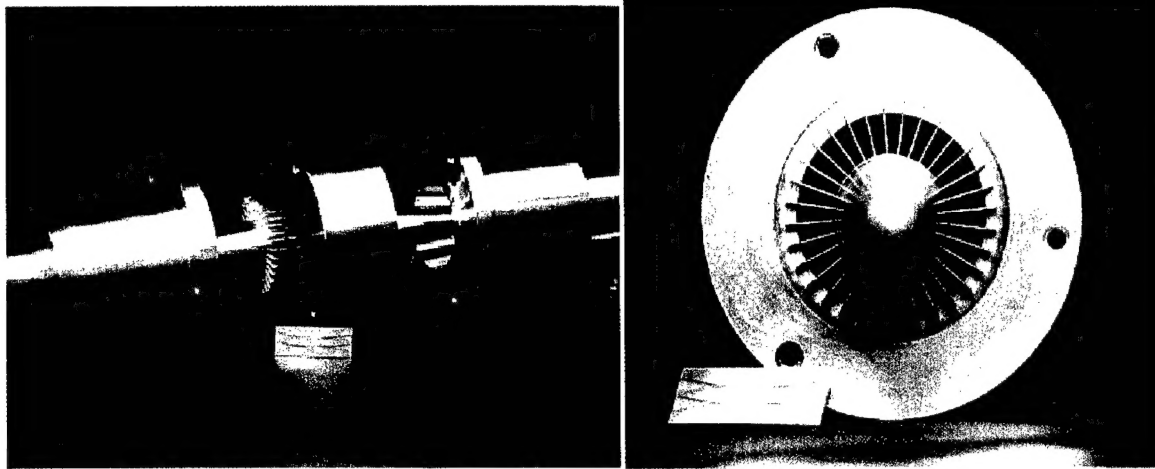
(a) Exploded view of coaxial combiner. (b) Axial view of center section with finline cards.
